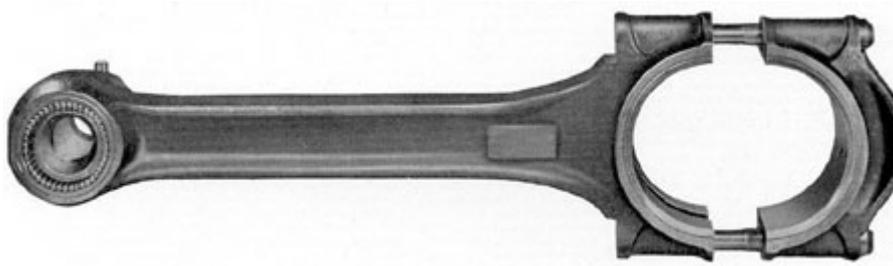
Connecting rod with needle roller type piston pin bearing, F-M.
